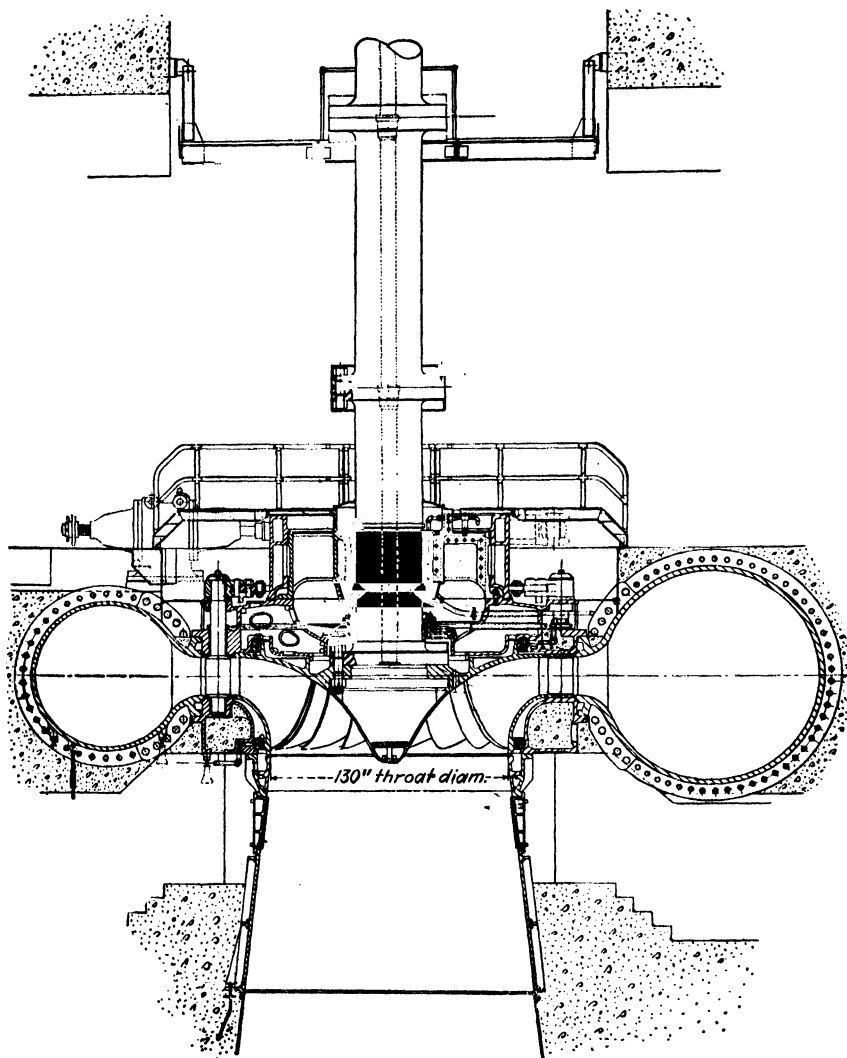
Sectional elevation of 115,000-hp turbines for Hoover Dam power plant. 510 ft head, 180 rpm. (*I. P. Morris Division, Baldwin-Southwark Corp.*)
